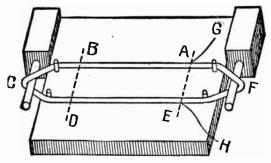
Method of winding "straight out" coils. There are several ways of making these coils. A former may be prepared, as shown in the figure, with a board having inserted four pins, and having attached two blocks at the ends carrying horizontal pins as shown. Around the several pins, the coil is wound to the required number of turns and taped. This coil differs from the evolute coil in that the two halves are of equal size, the parts which act respectively as upper and under inductor being of equal length. The coil as shown is suitable for wave winding.
